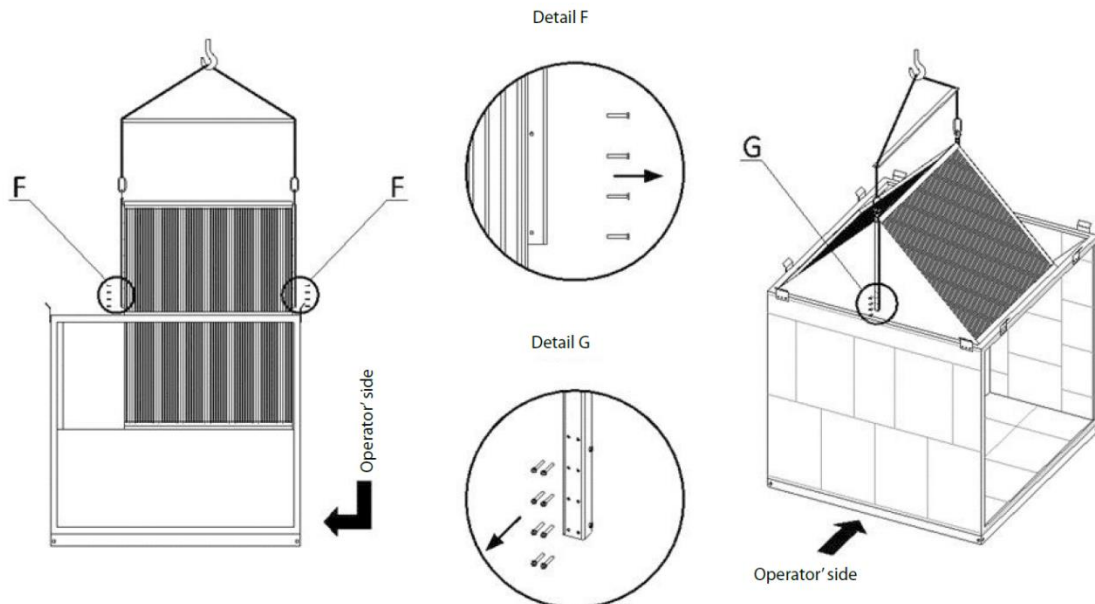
Preparation for removing recuperator rods – removal of bolts
